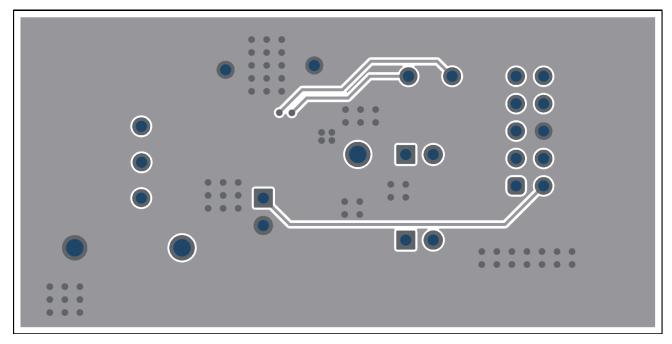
LP5815DRLEVM and LP5815YCHEVM PCB Bottom Layer
